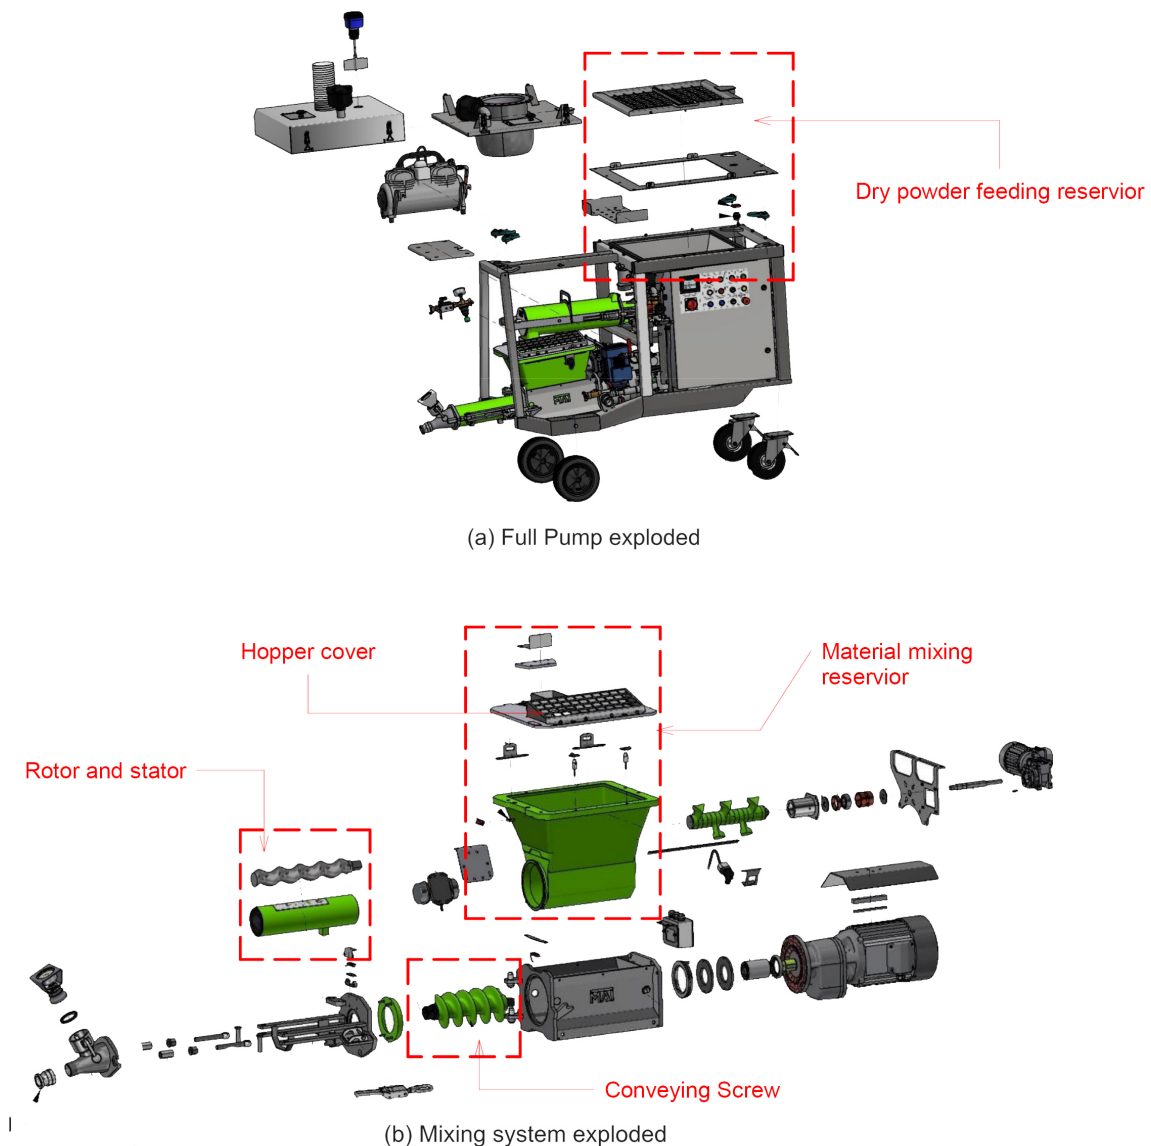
Components of the MAI 4MultiMix 3D Pump: An Exploded View Diagram Highlighting Key Parts
